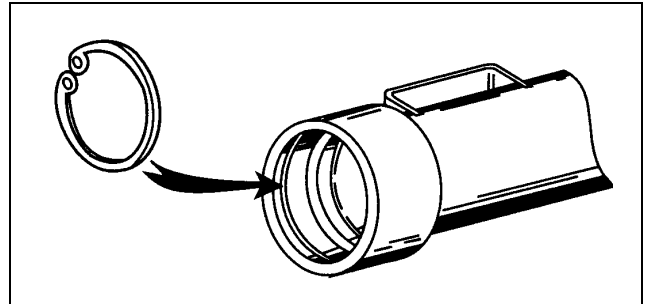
Installing Retainer Ring on Telescope Cylinder Barrel.
